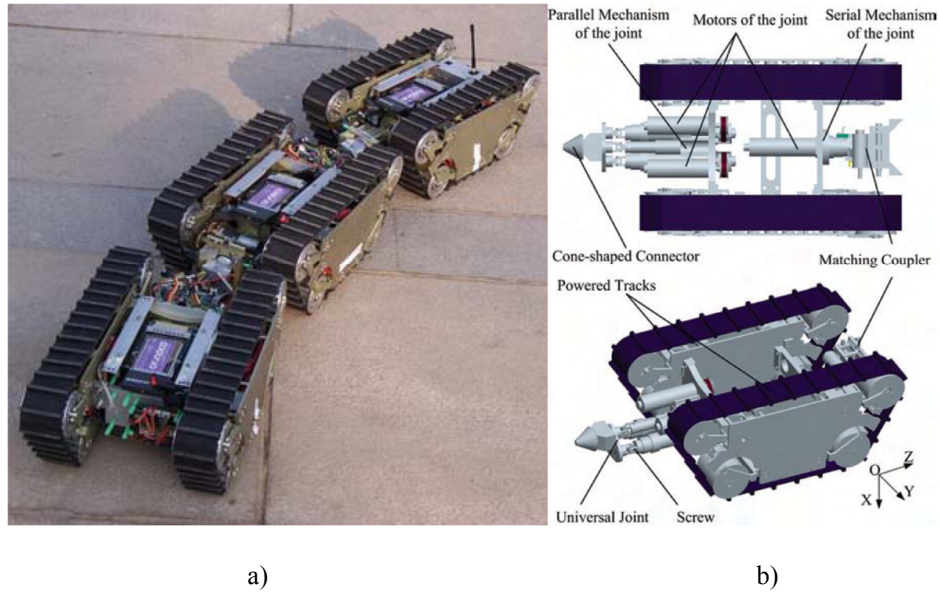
Mobile self-assembly robotic system [7]: a) connected; b) internal design.
